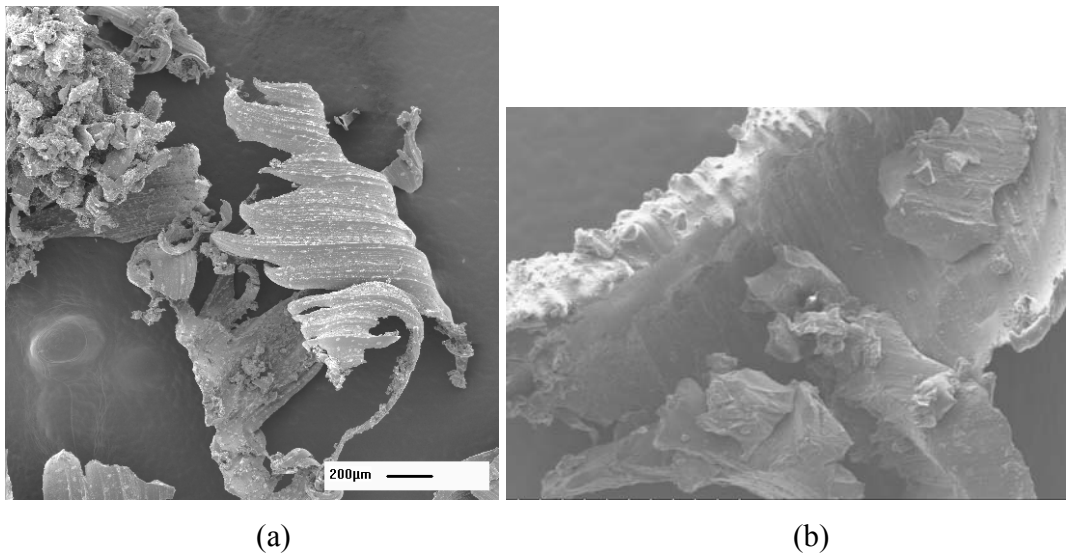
SEM micrographs: (a) The RC and B types of chips machined by Tool 4 with 2.12 mm/s feed speed and 5500 rpm, and (b) chip with burned edge, machined by Tool 2 in Experiment I.
